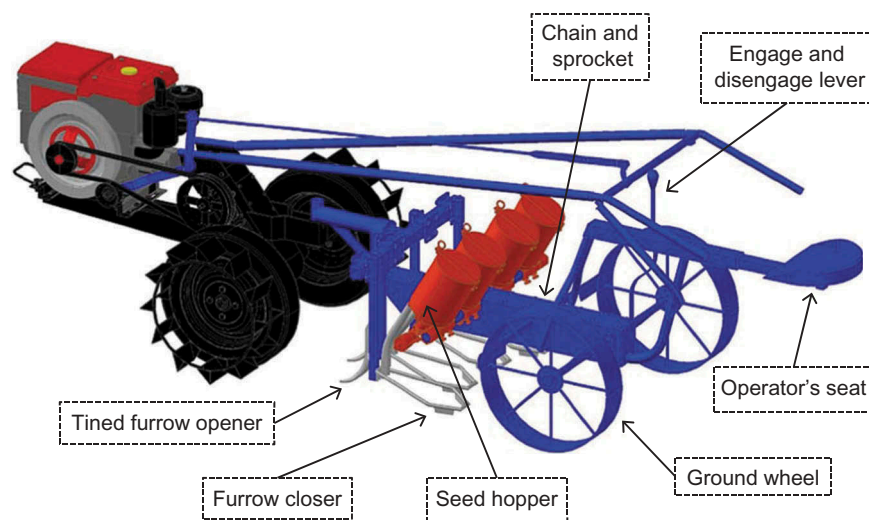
The prototype of a multigrain seed drill designed at the Philippine Rice Research Institute. The prototype had a ride-on attachment to a two-wheel tractor, a built-in furrow opener and closer, an inclined circulating replaceable seed plate (for seed metering), and seed hopper made of plastic containers. The seed metering was driven by ground wheels through chain and sprocket combination with the provision of engaged and disengaged lever. The furrow opener was positioned in one line. The chain and sprocket drives, which were simplified into a single-stage conversion, were covered with metal plates to protect it from dust during operation and avoid chain damage. The bevel gears were added to rotate the drive shaft of seeding plate from the ground wheel.
